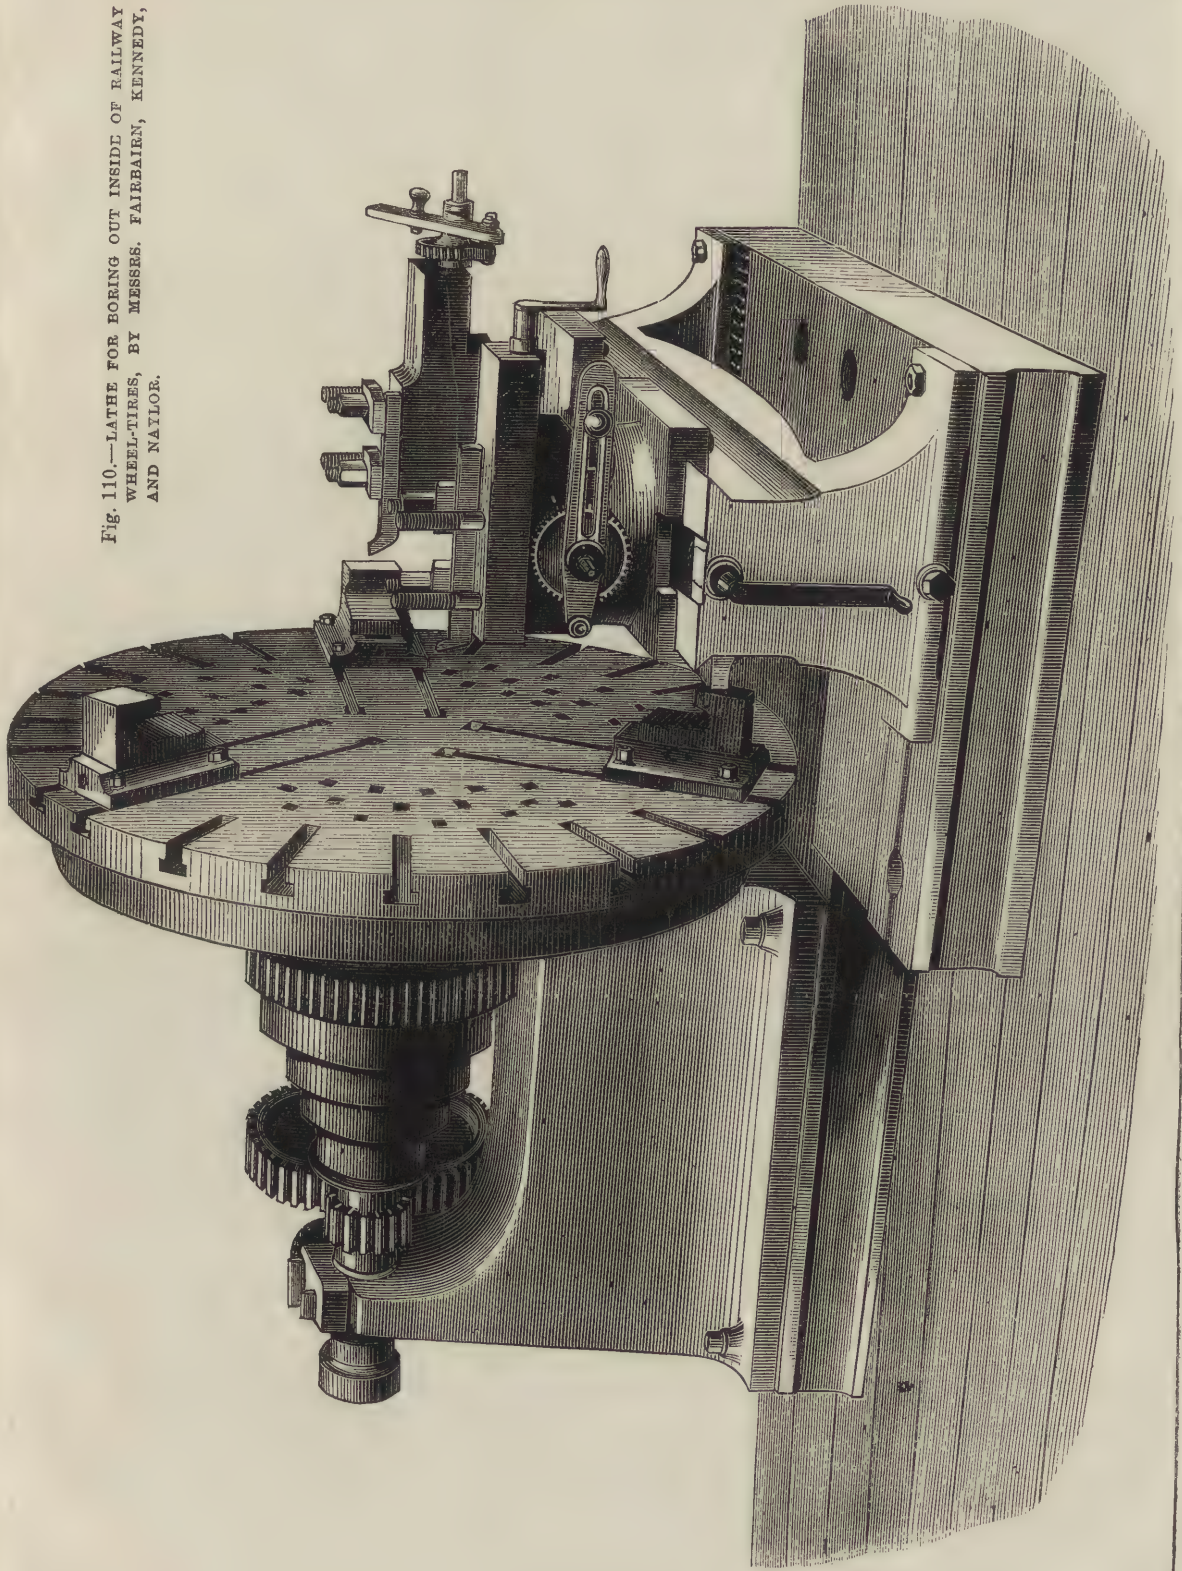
LATHE FOR BORING OUT INSIDE OF RAILWAY
